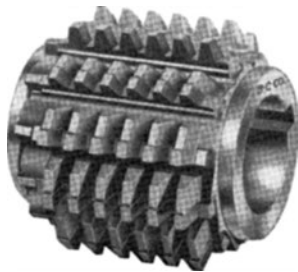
Built-up hob with carbide blades. (Courtesy of Barber Colman Co., Rockford, Illinois.)
